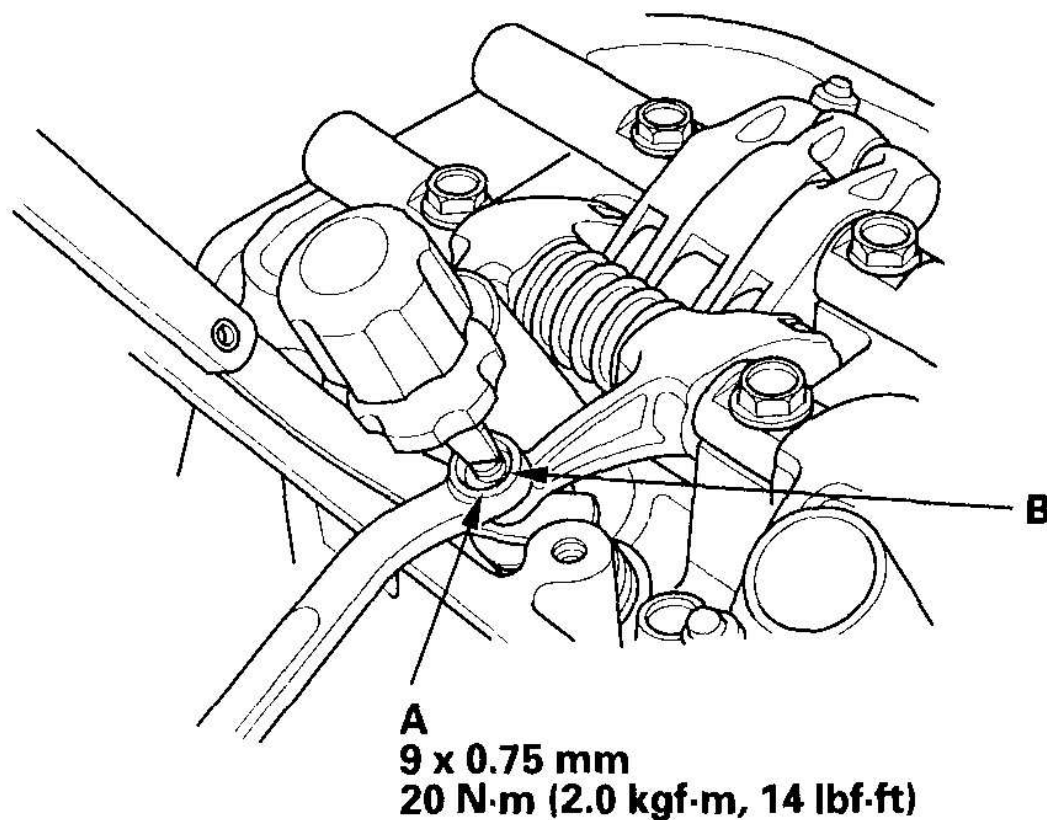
Inserting Feeler Gauge Between Adjusting Screw And End Of Valve Stem On No. 1 Cylinder
